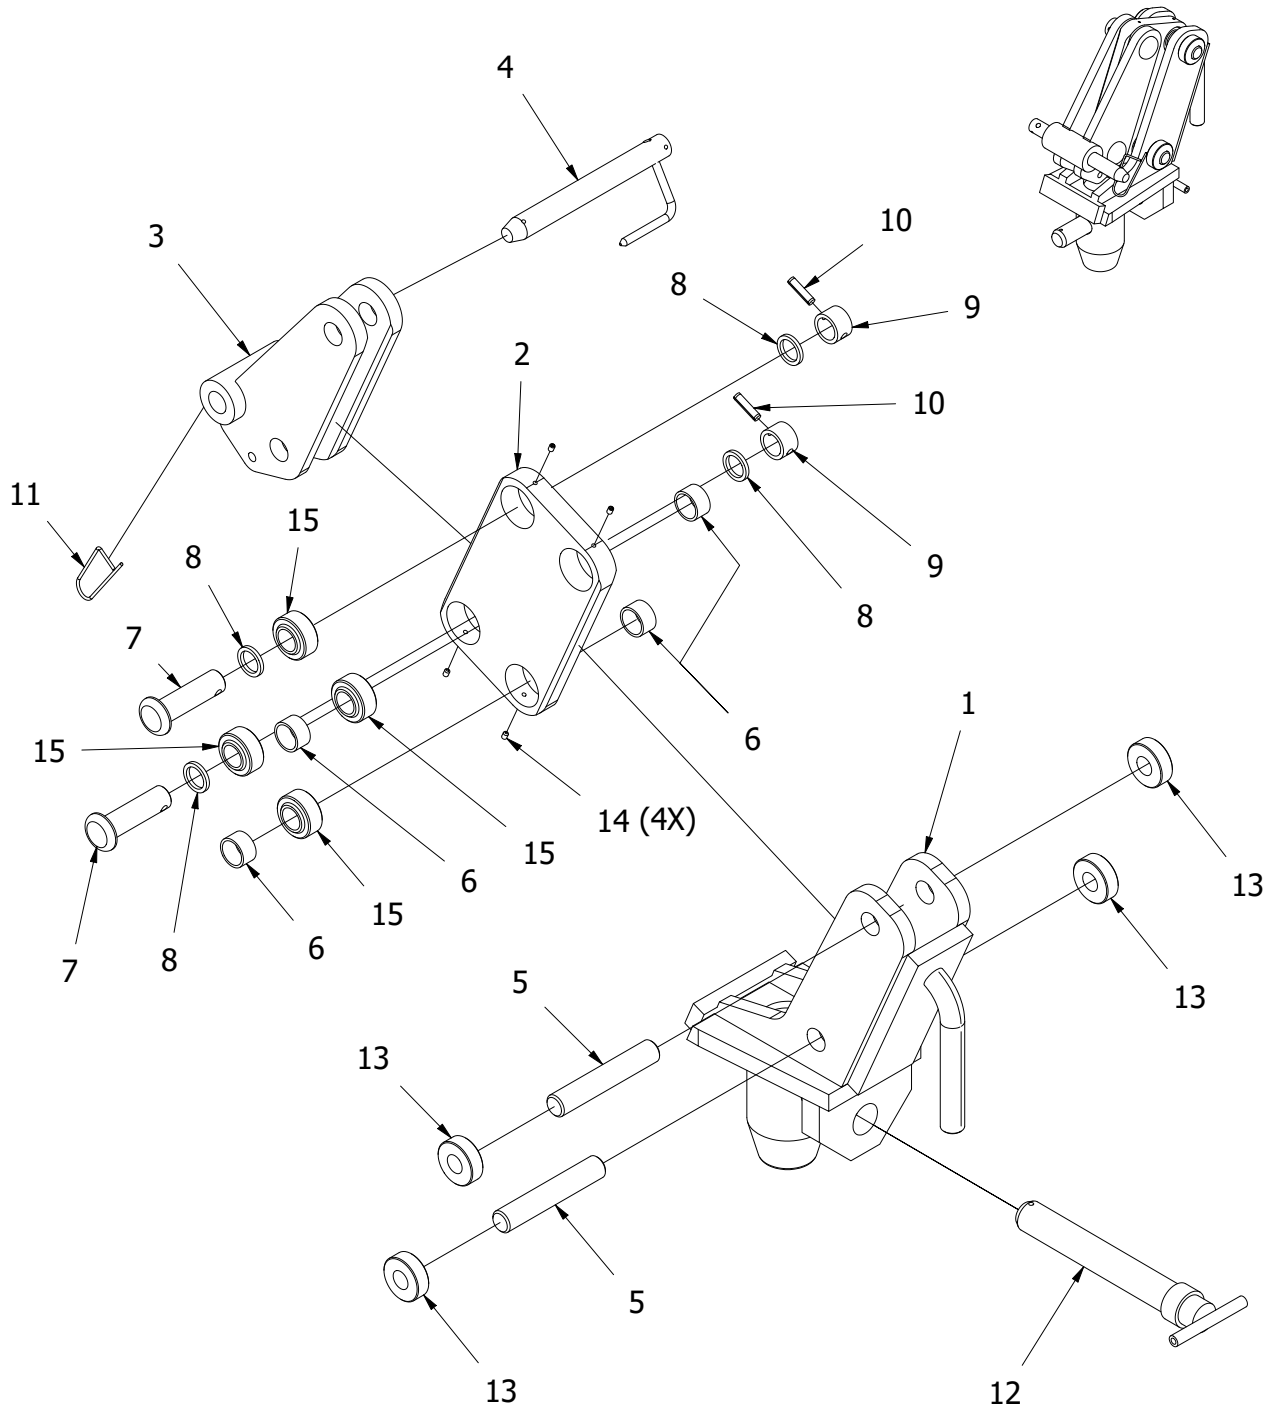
AM-1928-B34 Forward Mount Assembly, RH
